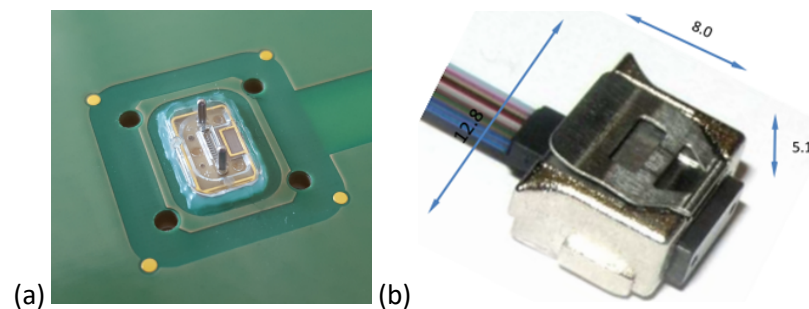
(a) Coupling unit assembled on optical PCB, (b) small size MT-ferrule based connector
